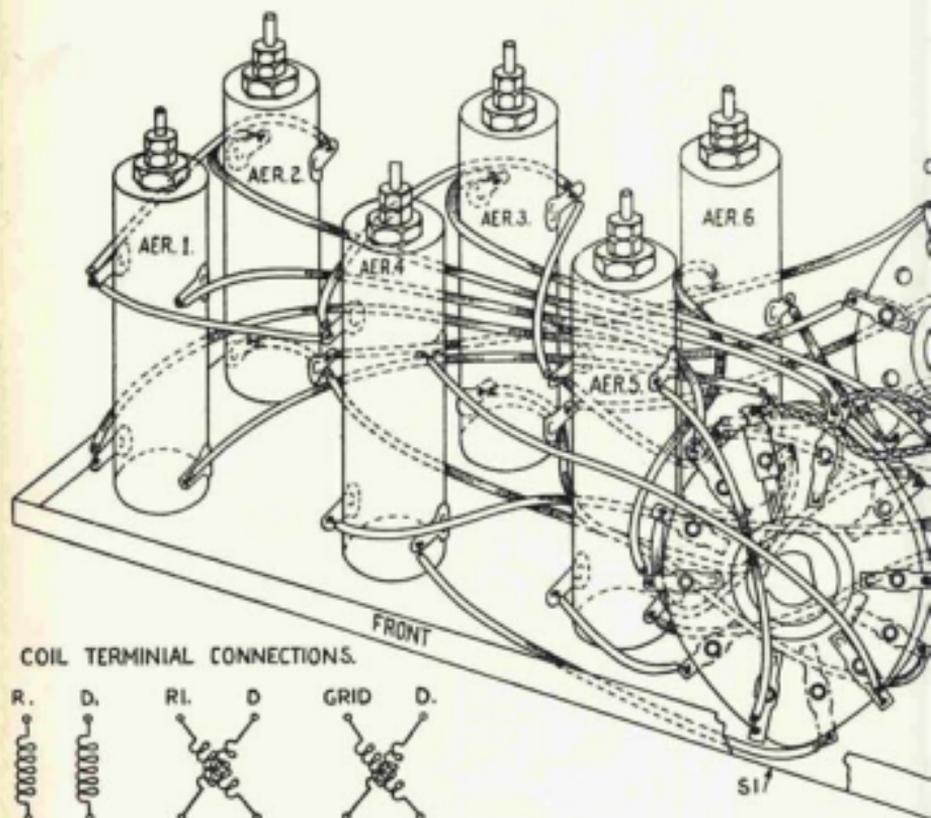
COIL ASSEMBLY. H.F. SECTION.
